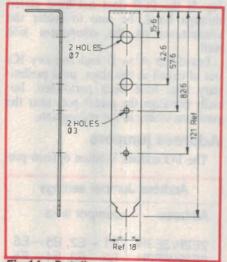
Details of the holes to be drilled in the rear mounting bracket.
